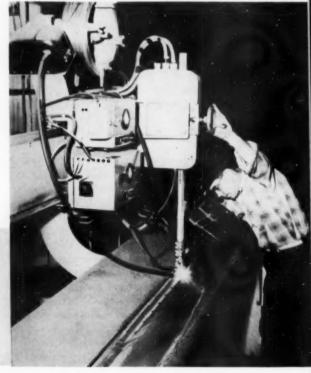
Automatic inert-gas (argon) welding operation on a three-inch Type 316L, 14-gage stainless steel pipe for use in a paper mill. Longitudinal weld is made at travel of 18 to 20 ipm with Type 316L filler rod fed from reel. Provision is also made for channeling argon to underside of weld to prevent loss of alloy constituents.
